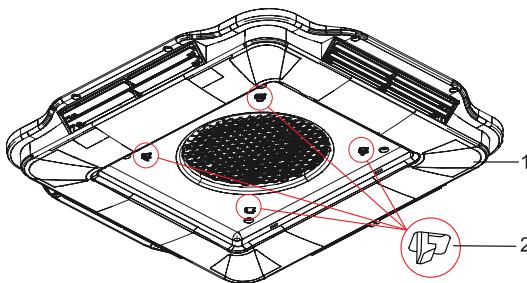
Attaching the air distributor assembly to the mounting bracket
